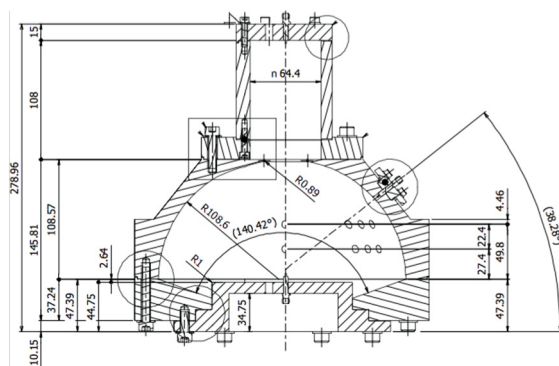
Cross-sectional drawing of mushroom-shaped aluminum test cavity.
